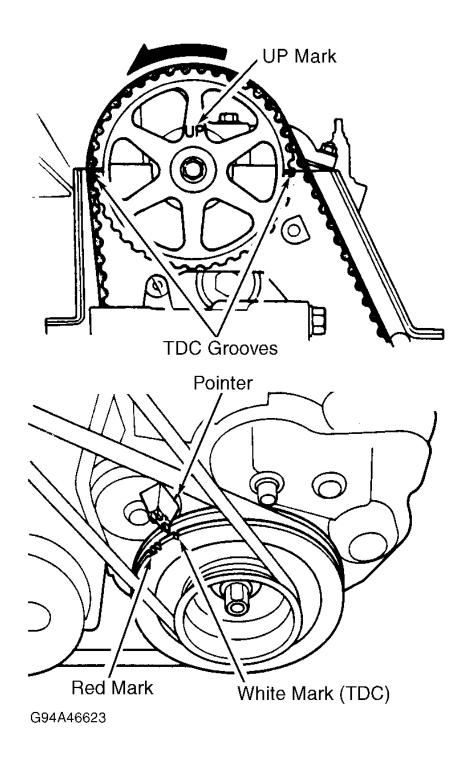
Positioning Camshaft Sprocket for Valve Adjustment (2.2L SOHC - Accord) Courtesy of AMERICAN HONDA MOTOR CO., INC.
